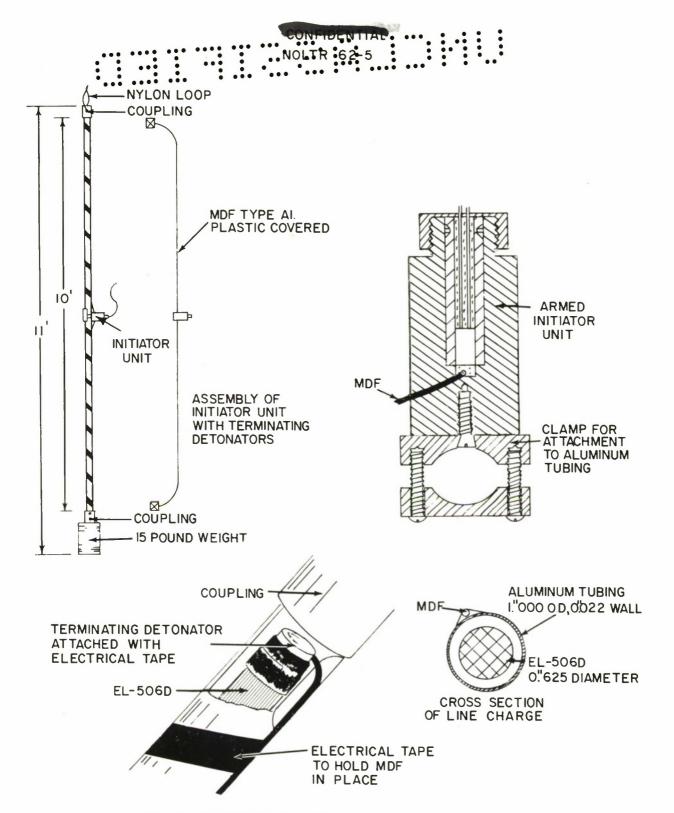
CONSTRUCTION DETAILS OF DOUBLE END INITIATOR
